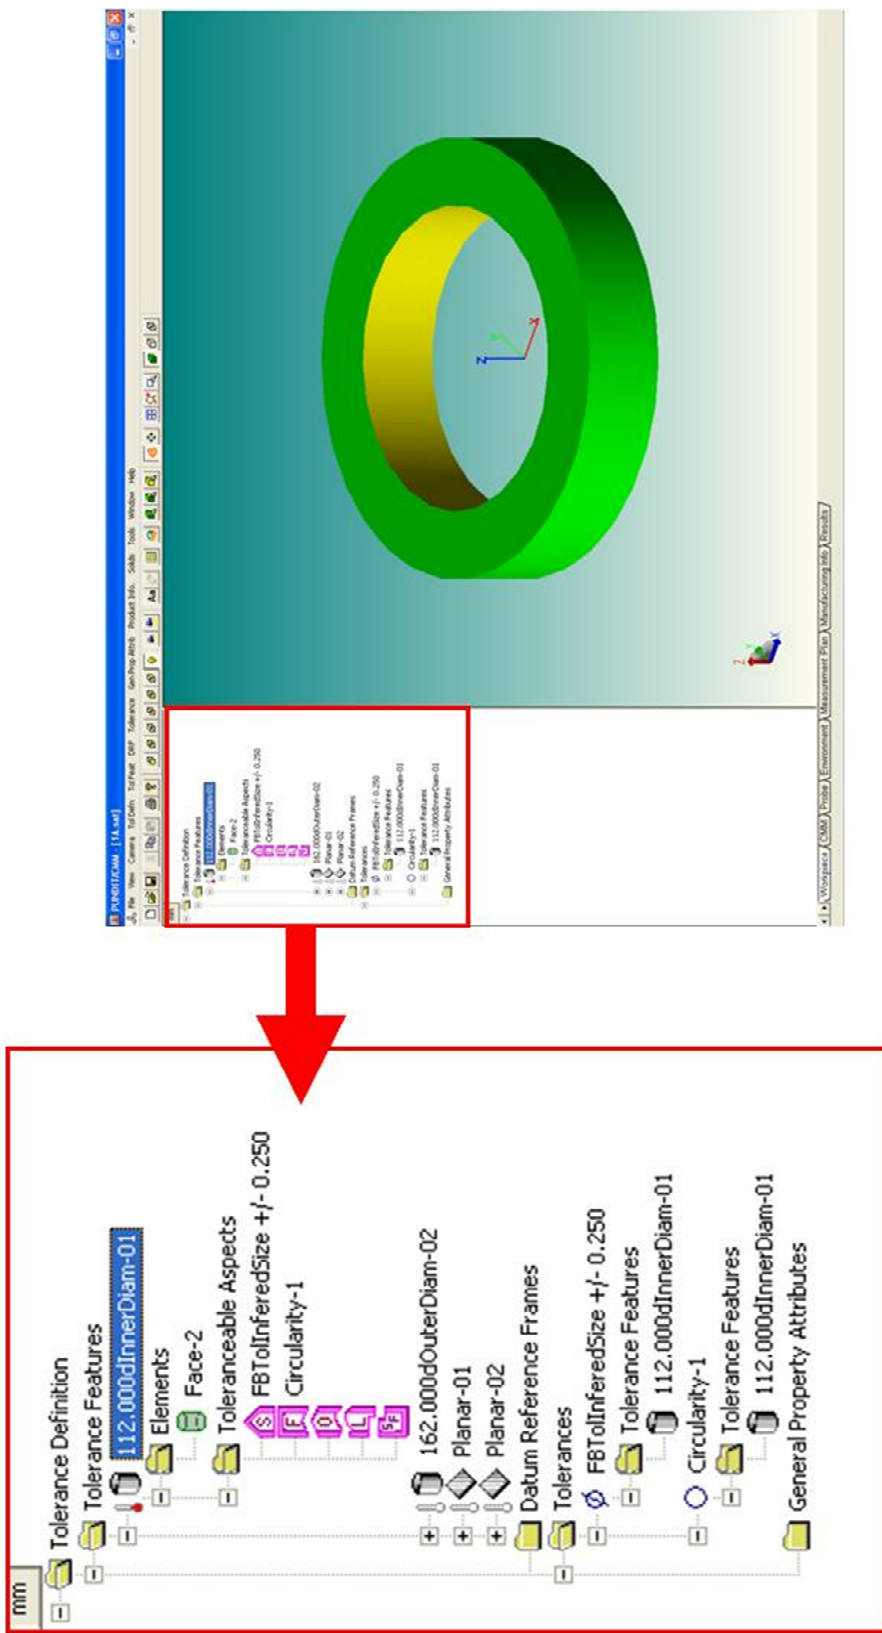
PUNDIT CAD Interface and Tolerance Definition, Workpiece Tab
